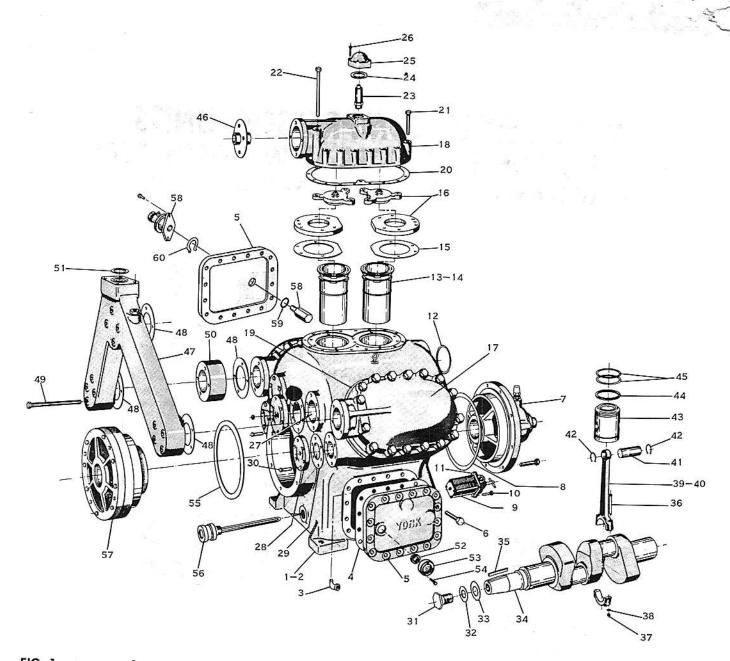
Typical 3 3/4" x 3 Compressor-Exploded View
